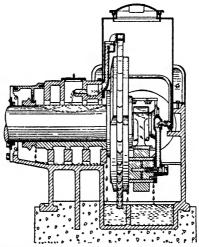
Crank disk supplies oil to main bearing and crankpin.
